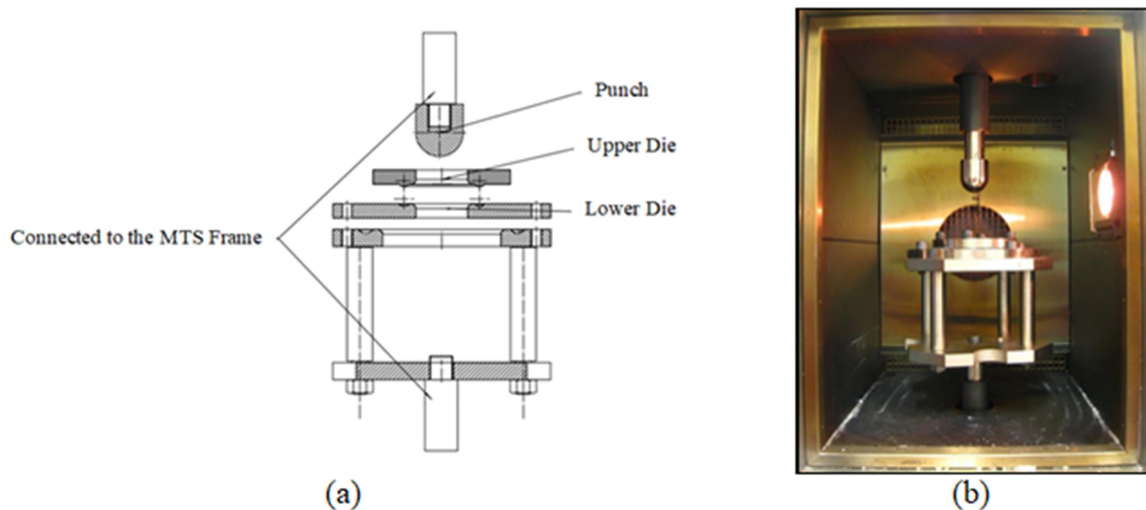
Photograph of the elevated temperature FLD tooling; (a) detail drawing and (b) actual tooling.
